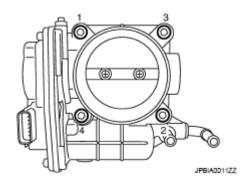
Electric Throttle Control Actuator Mounting Bolts
